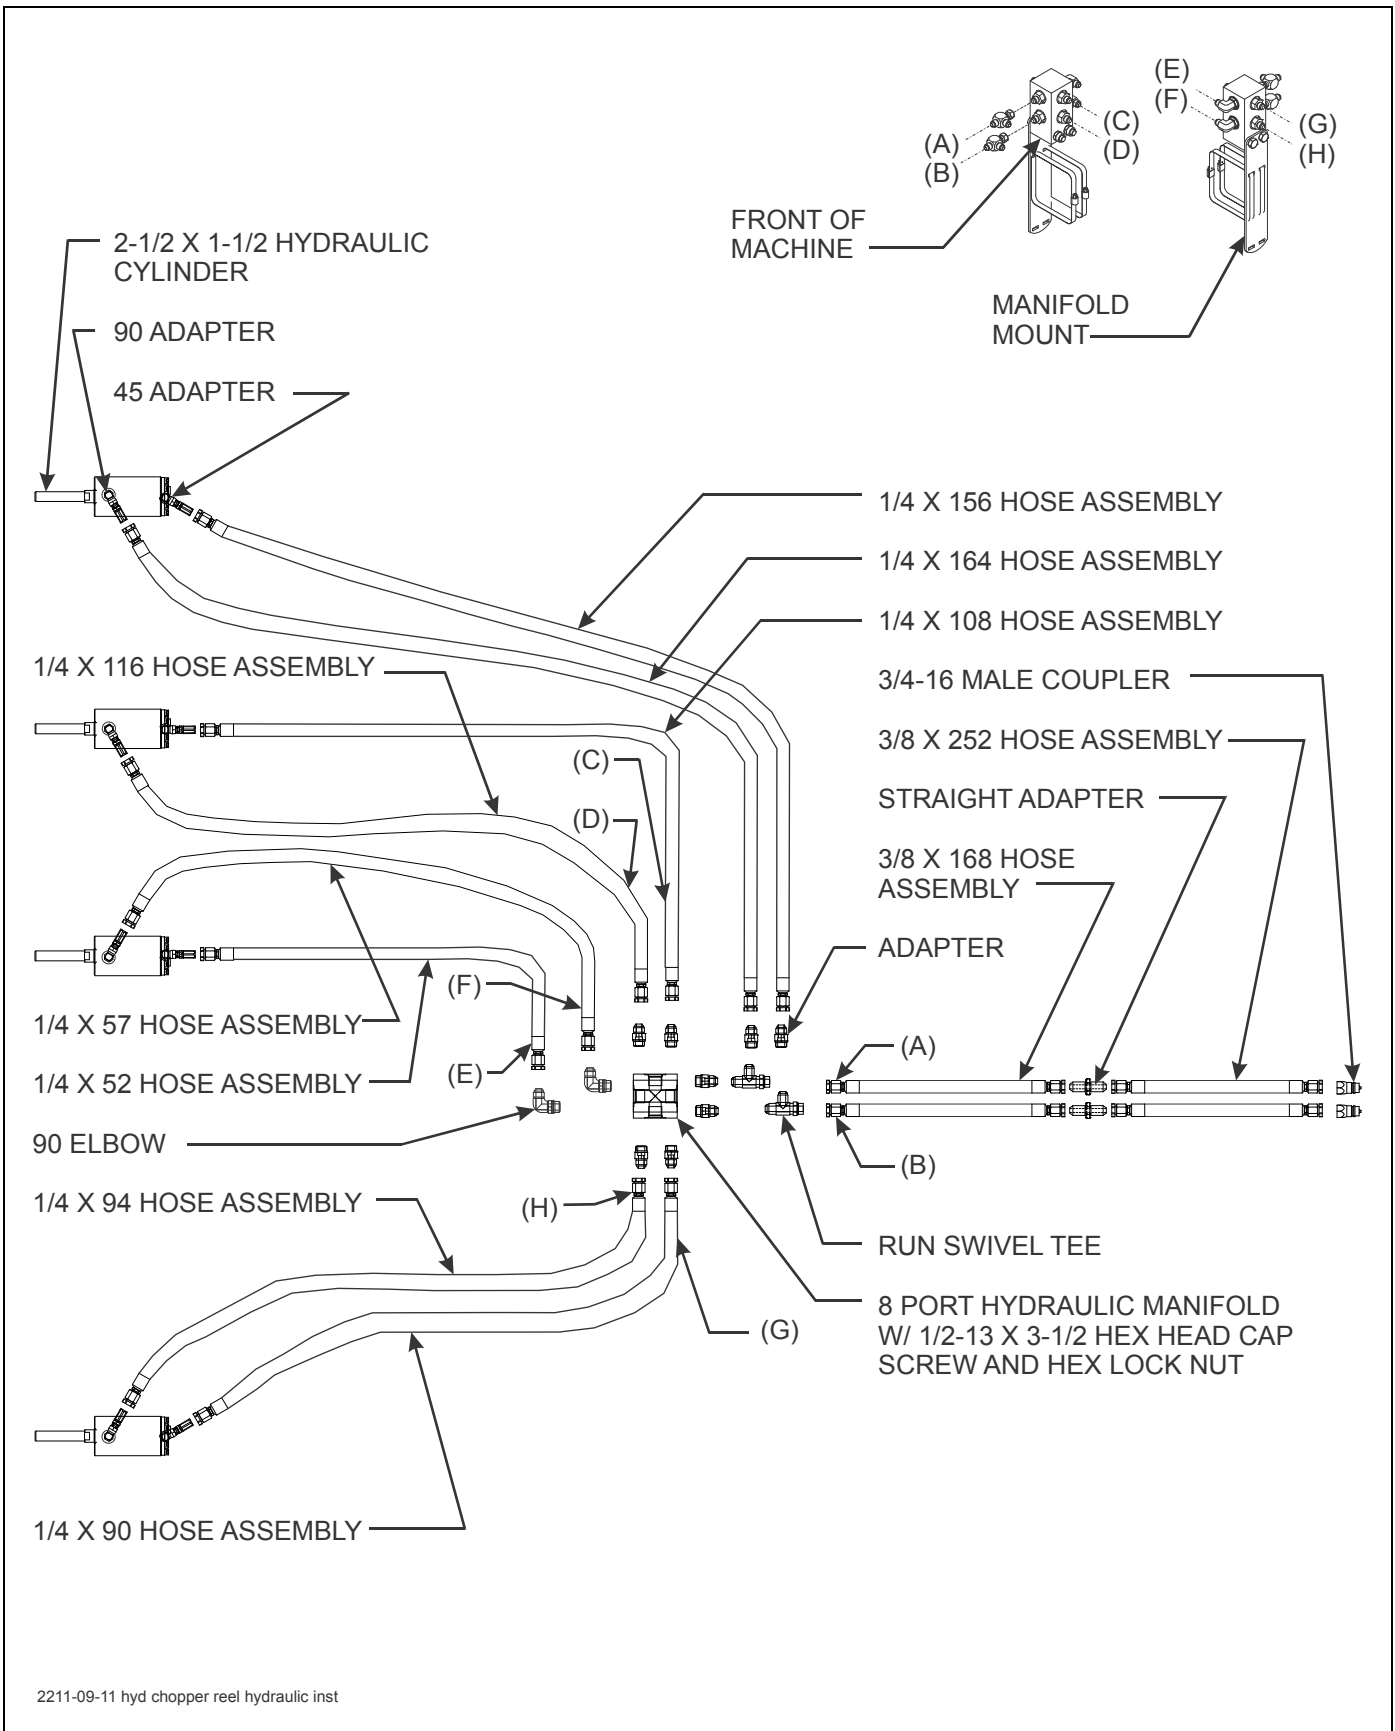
2211-09 & -11 Chopper Reel Hydraulic Installation (Option)
